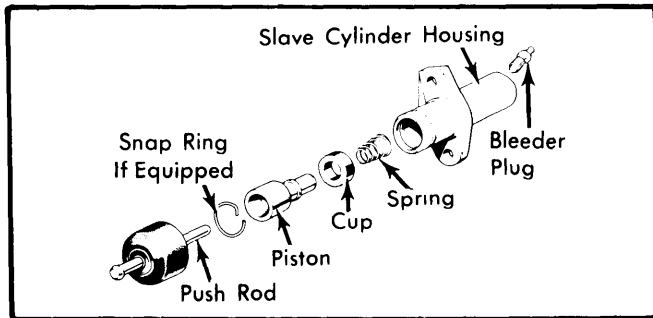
Exploded View of Clutch Slave Cylinder (TR7 Shown, Spitfire Similar)
